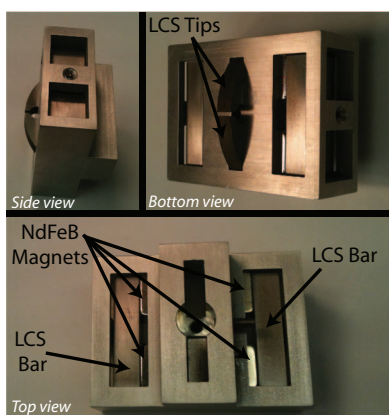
Images of the completed magnet assembly. An aluminum housing holds four 0.5-in. cube NdFeB N50 magnets between two LCS bars. Below the magnet arrays, two LCS tips are press fit into the housing to direct and focus the magnetic fields.
